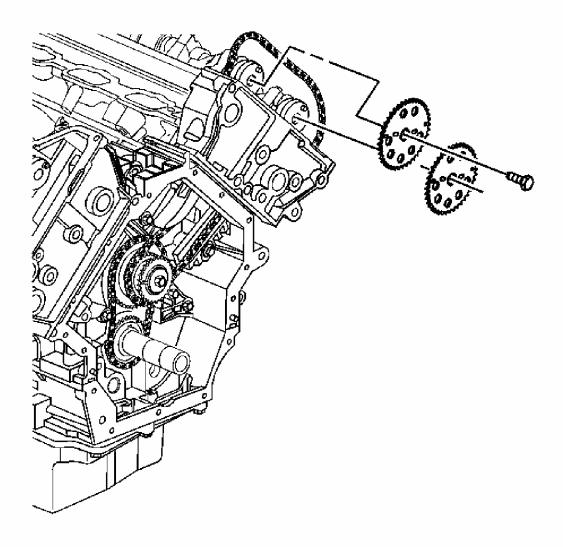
View Of Left Intake & Exhaust Camshaft Sprockets & Drive Chain Courtesy of GENERAL MOTORS CORP.
